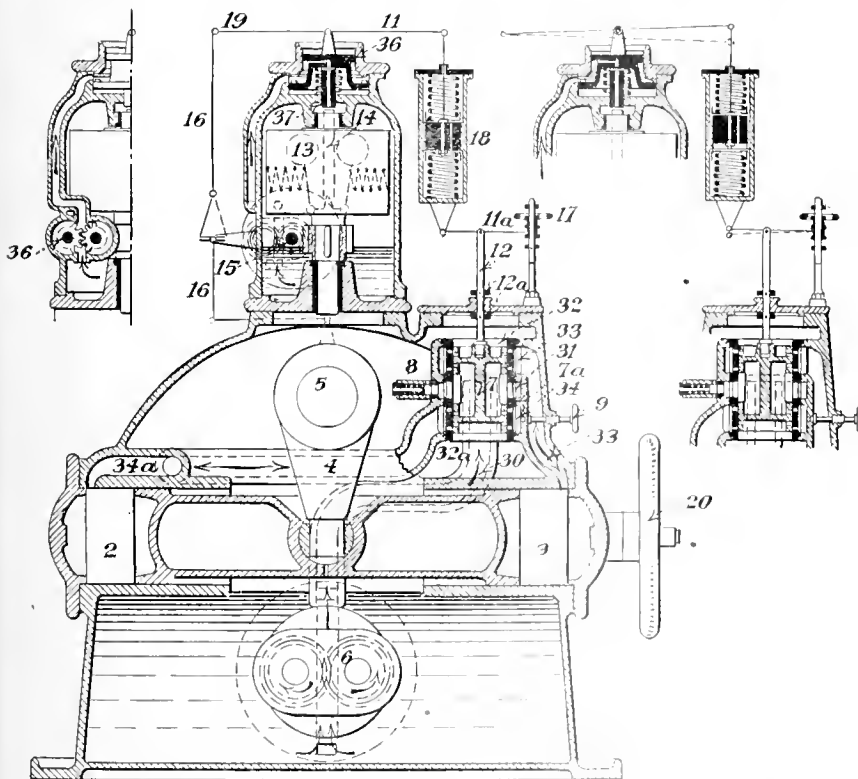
SECTION AND DETAILS OF THE NEW GOVERNOR ON THE KUBEL HYDRAULIC TURBINE
